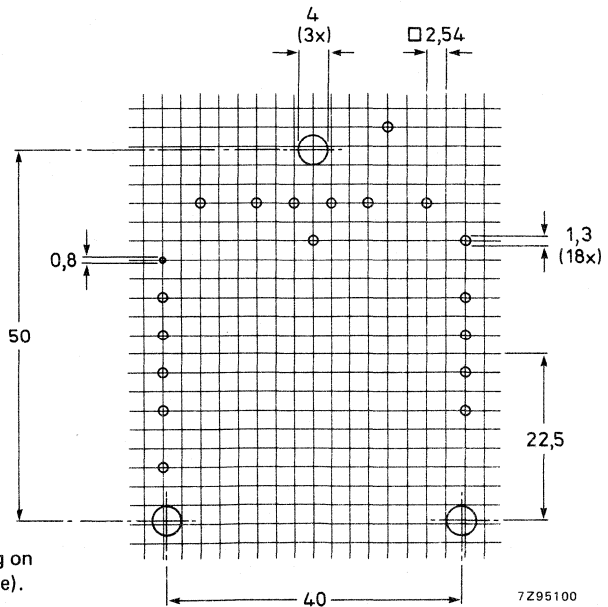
Hole pattern for mounting on a printed-wiring board (solder side).
